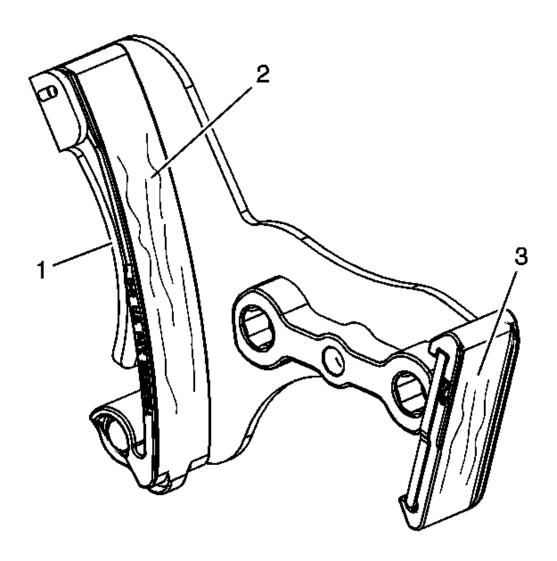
View Of Timing Chain Tensioner Inspection Points Courtesy of GENERAL MOTORS CORP.
